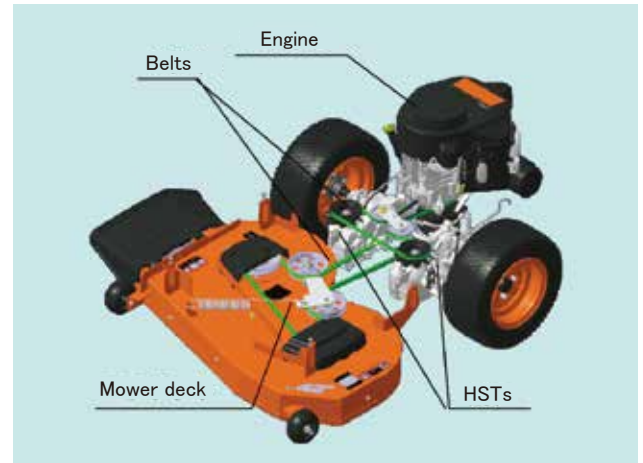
Drive Unit Configuration of Engine-type Zero Turn Mower
